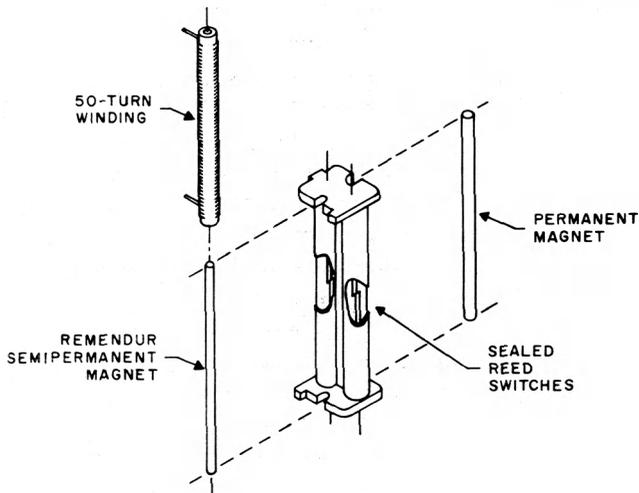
Bipolar Ferreed Switch (Exploded View)
